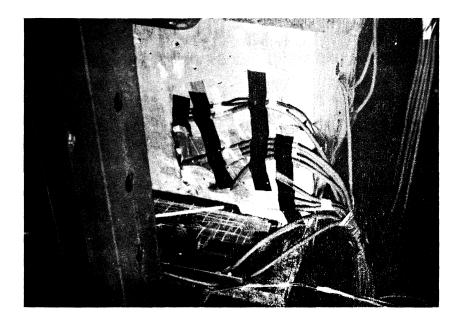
Tempilstik marks and thermocouple wires prior to welding.
